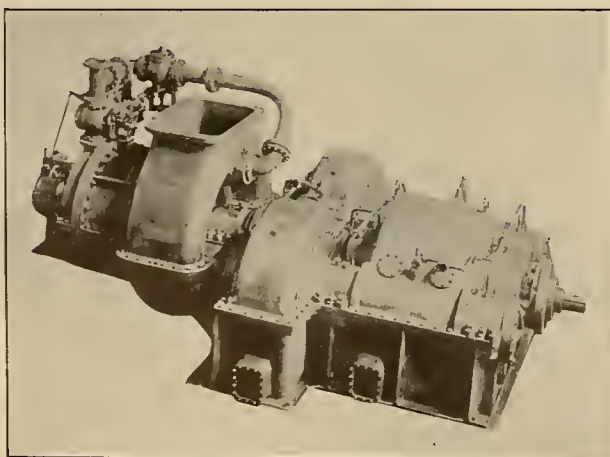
Assembled Reduction Gear Turbine, 2600 h.p.
